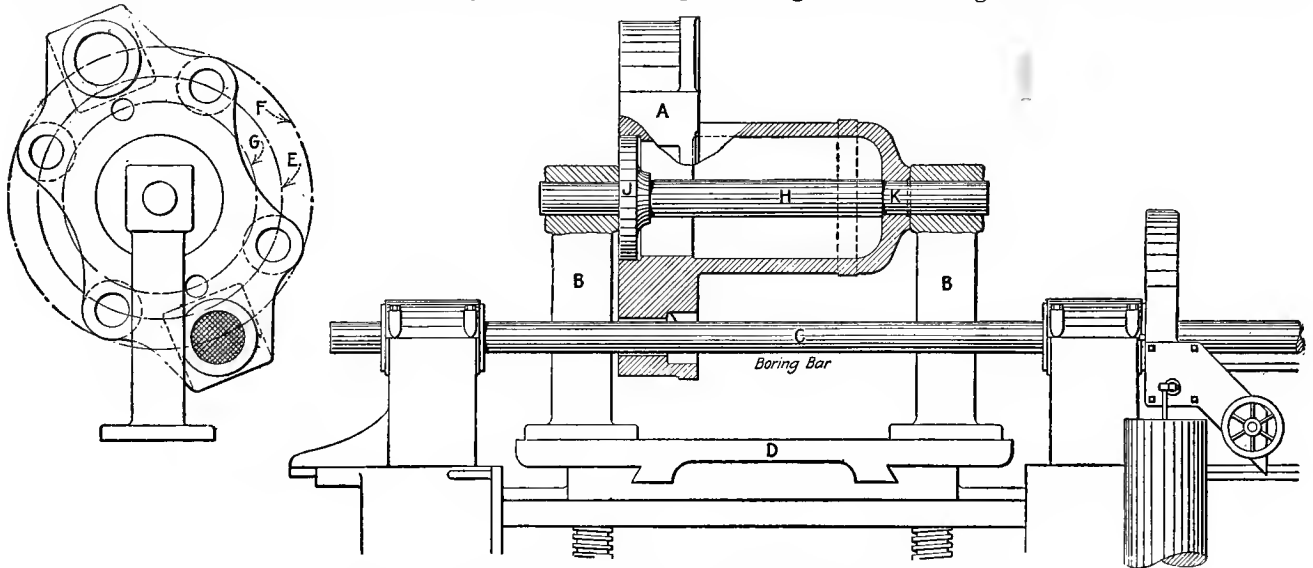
ARRANGEMENT FOR BORING CYLINDER BOLT HOLES
